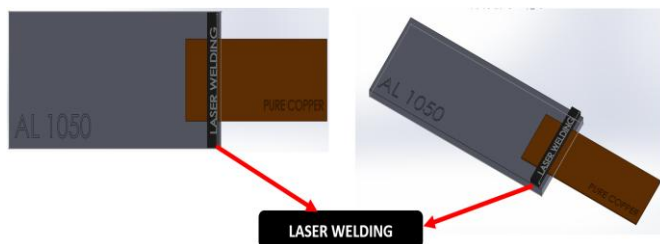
Schematic Representation of the Laser Welding Process [6]
